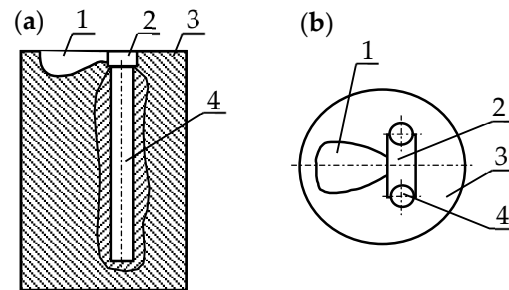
The diagram of the casting mold: 1—pouring cup, 2—sprue, 3—mold, 4—casting (samples): (a) section, (b) top view.
